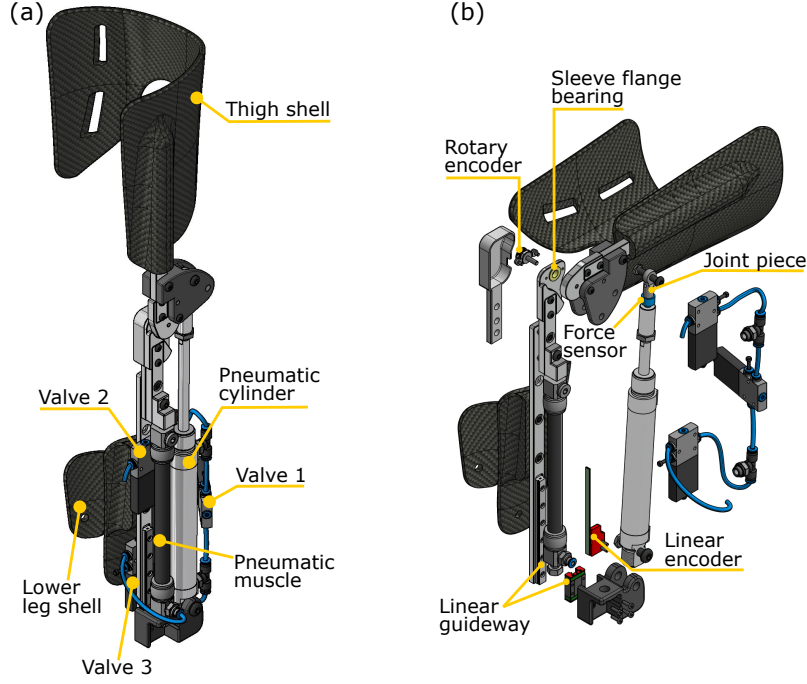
In (a) the PEJM CAD model applied to the knee exoskeleton, in (b) an exploded view.
